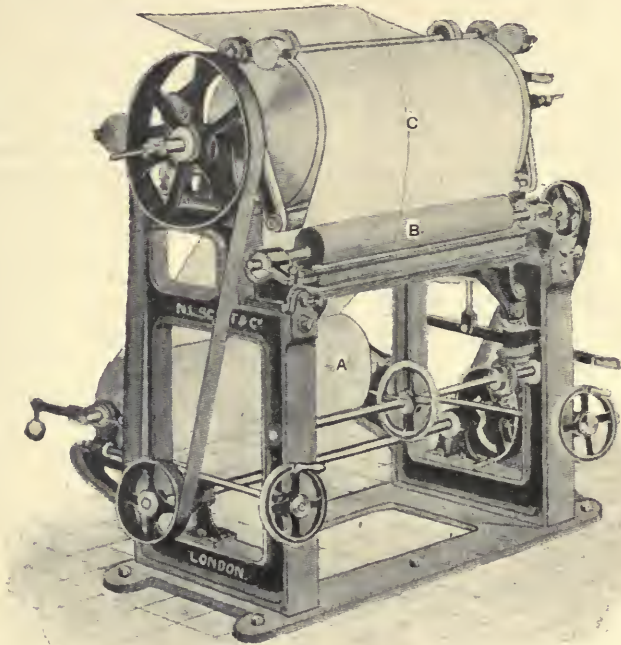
N. L. SCOTT & Co.'s MACHINE FOR COATING PAPER.
